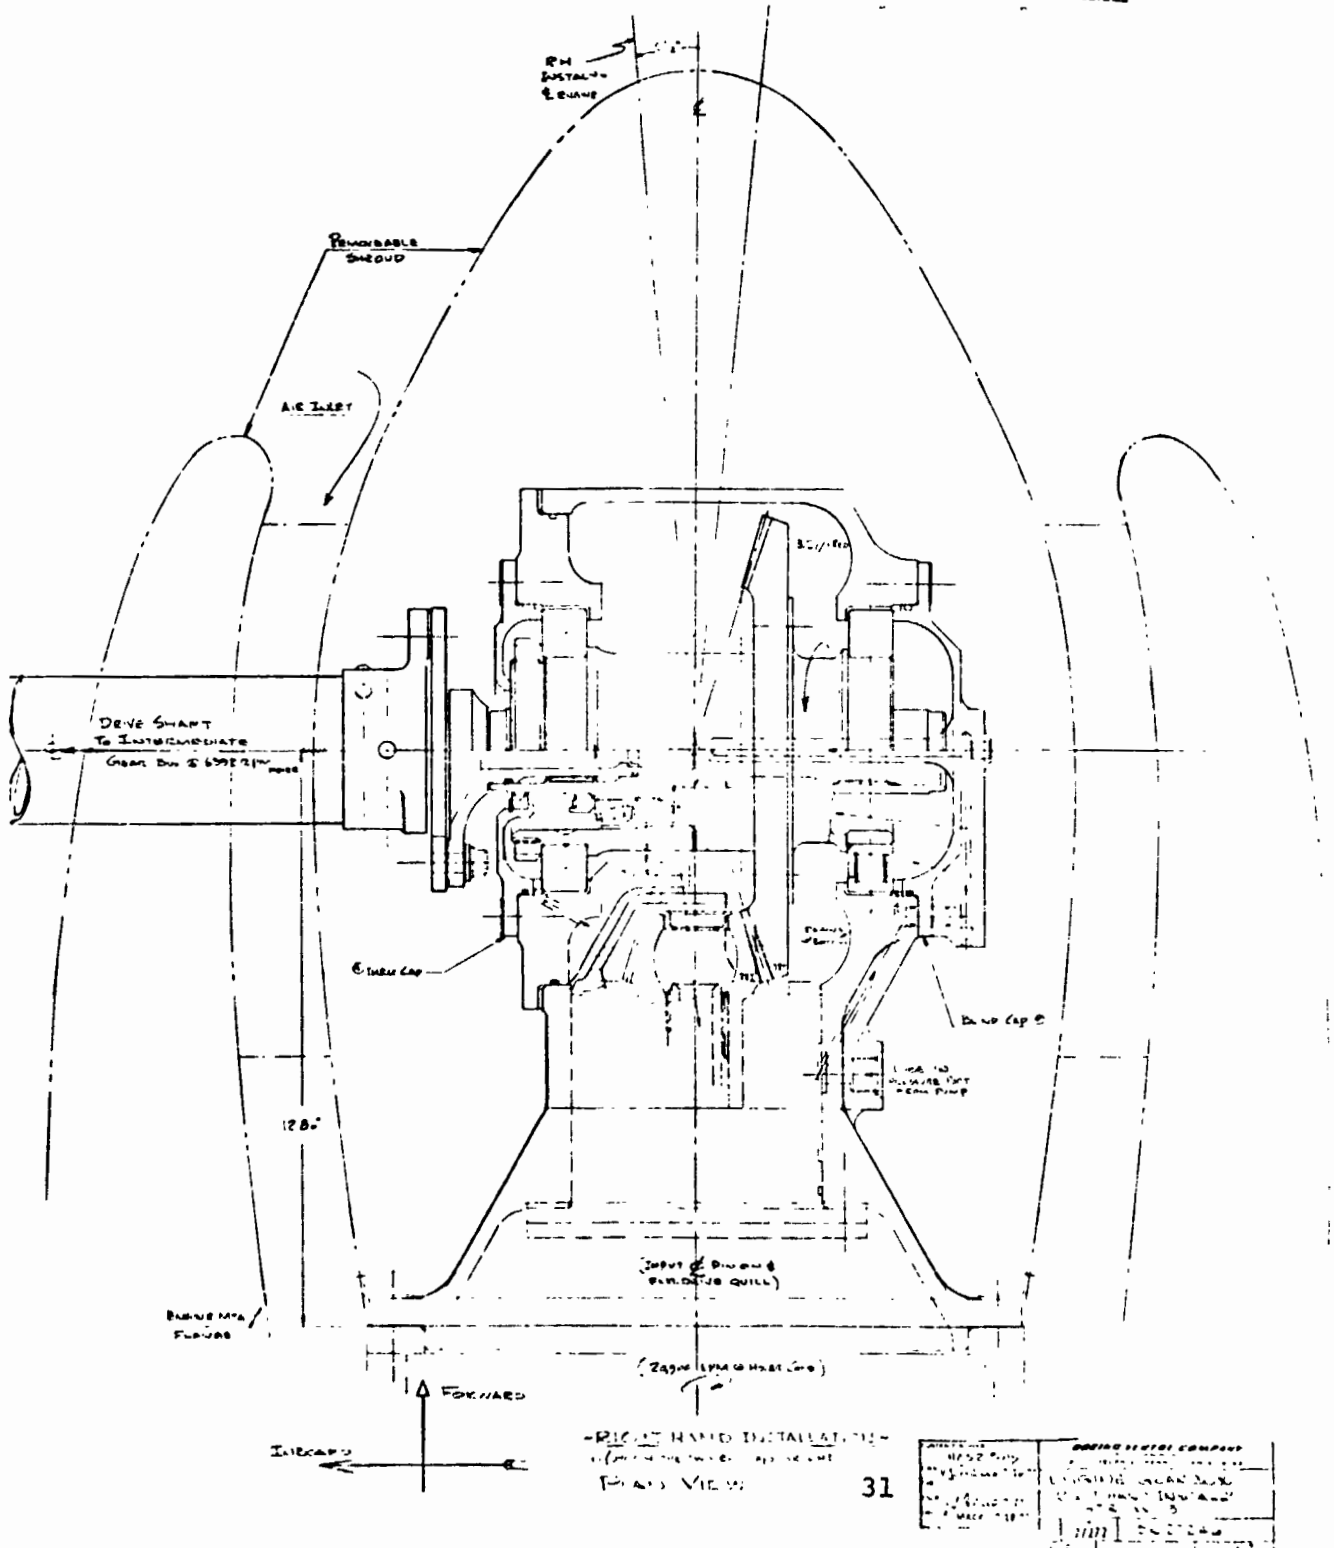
ENGINE GEARBOX - RIGHTHAND INSTALLATION - HTR XV-15
